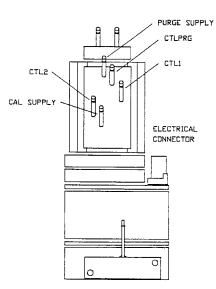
Typical ZOC16TC/IP Valve Assembly (one-8 channel block shown for clarity)
